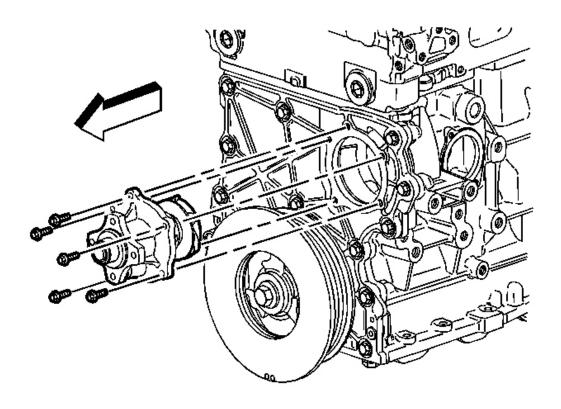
View Of Water Pump Pulley & Bolts Courtesy of GENERAL MOTORS CORP.
